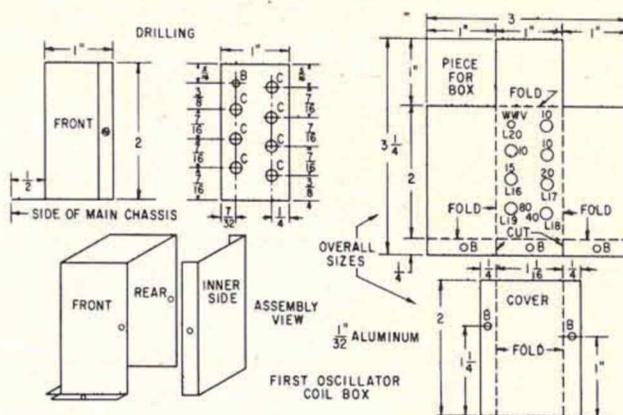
FORMING AND DRILLING diagrams for the first oscillator coil box which houses L<sub>13</sub> to L<sub>20</sub> on the chassis of the receiver. Holes for the coils are drilled after folding the main piece. Matching holes for No. 6-32 machine screws are drilled into the main chassis.
